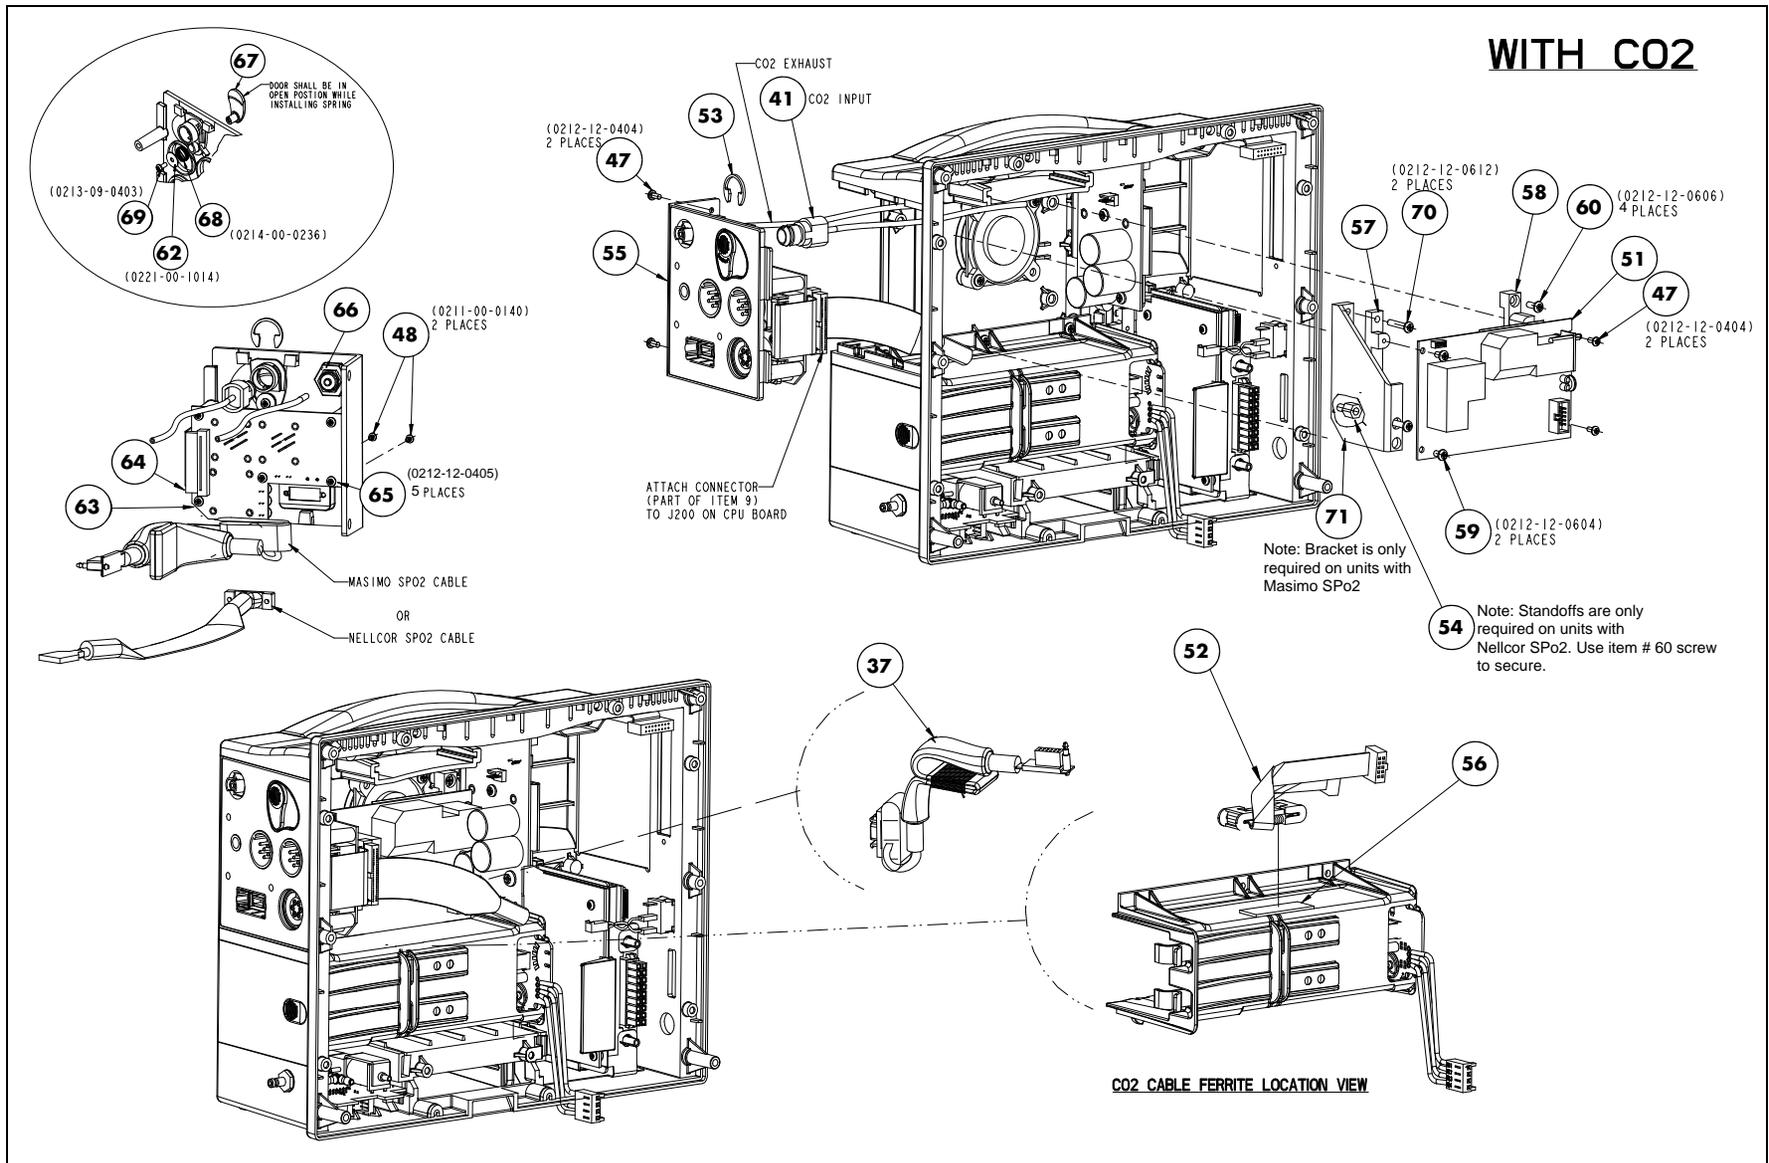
Rear Housing Assembly (Sealed Lead Acid battery configuration)
